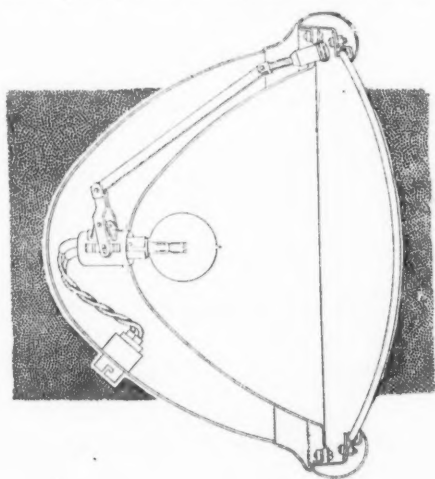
Gray & Davis electric headlight, showing bulb focusing mechanism
